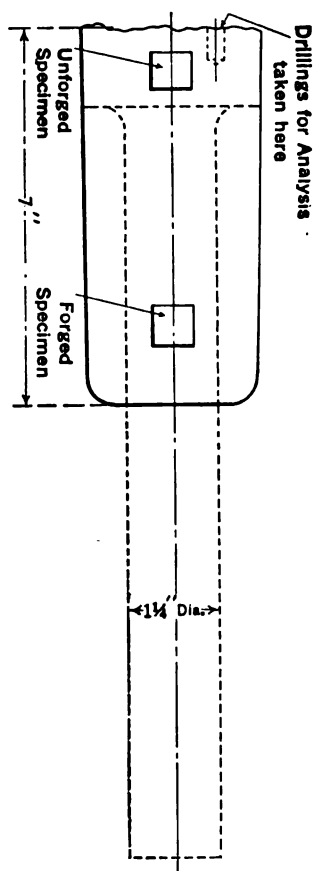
FORGED INGOT SHOWING POSITION OF SAMPLES.
